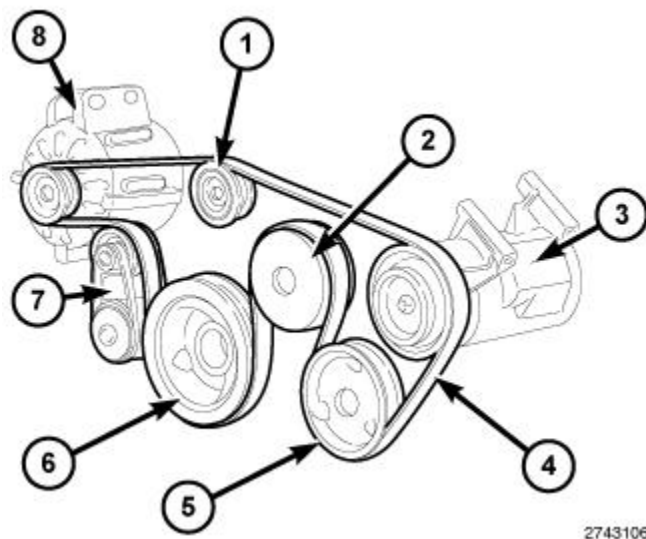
Drive Belt Tensioners & Accessory Drive Belt Routing
